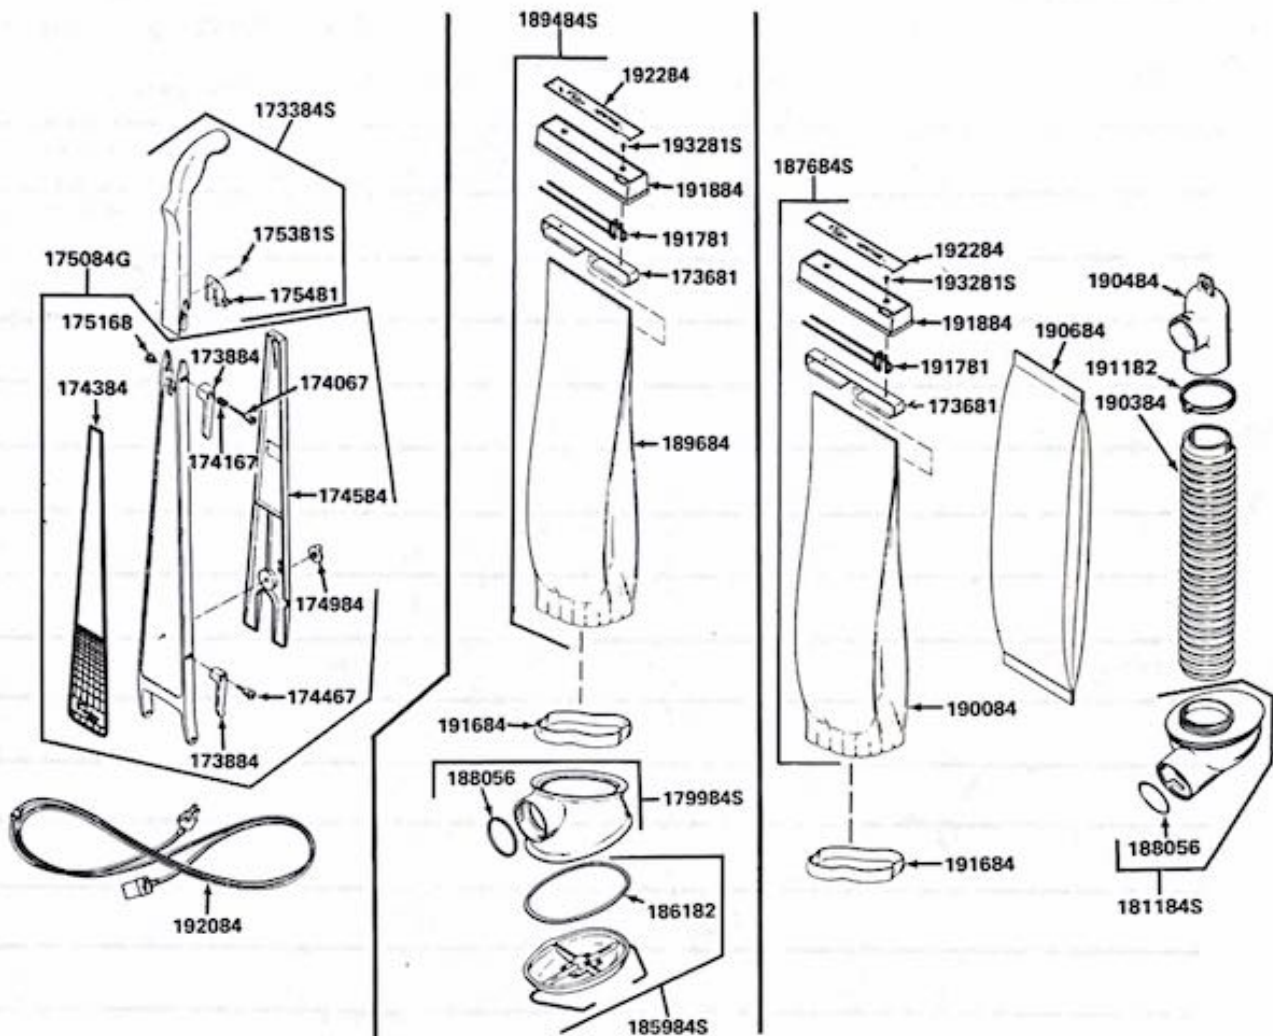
HERITAGE II handle, cord, bag, and emtor, exploded view
